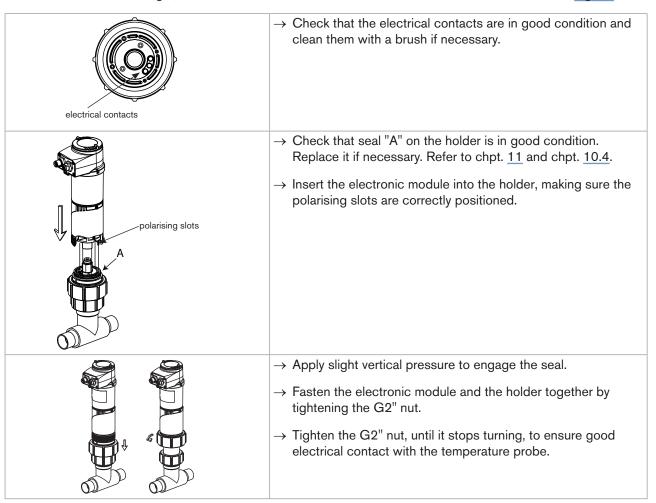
Mounting the electronic module to the sensor holder, after installation of the holder on a fitting
